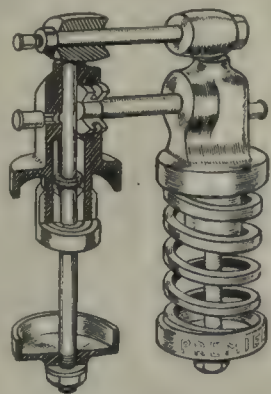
The Premier shock absorber partly in section with one spring removed.
